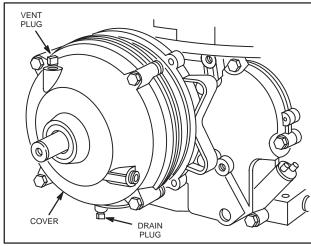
DRAINING GEAR REDUCTION AND REMOVING COVER
